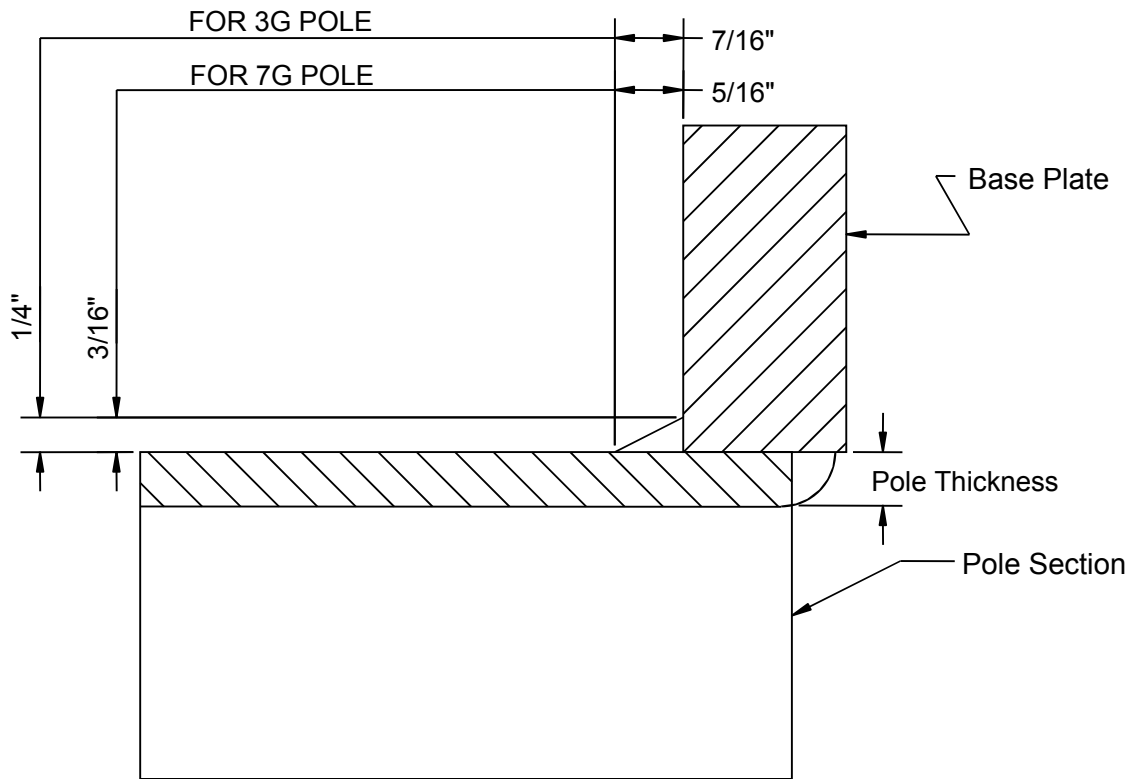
Standard Socket Welded Connection (Koenigs et al., 2003)
